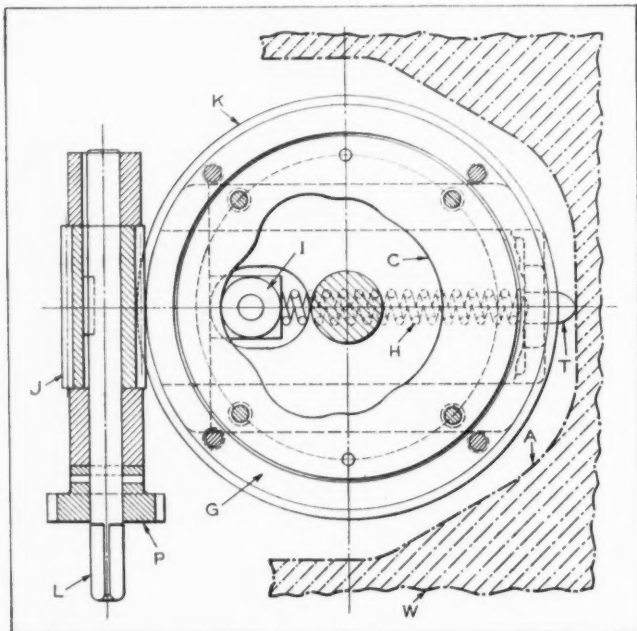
Section X-X, Fig. 1, and the Profile A Machined by Tool T Guided by Cam C
